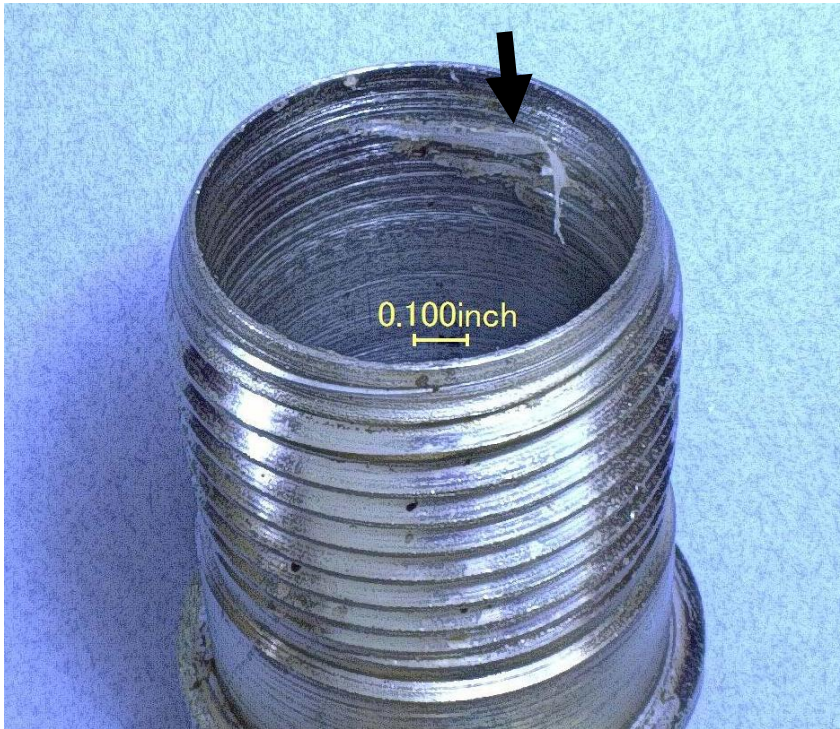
Photograph of the disassembled locking sleeve showing the inner surface and a transparent particle (film) that was circumferentially oriented, indicated by an arrow.
